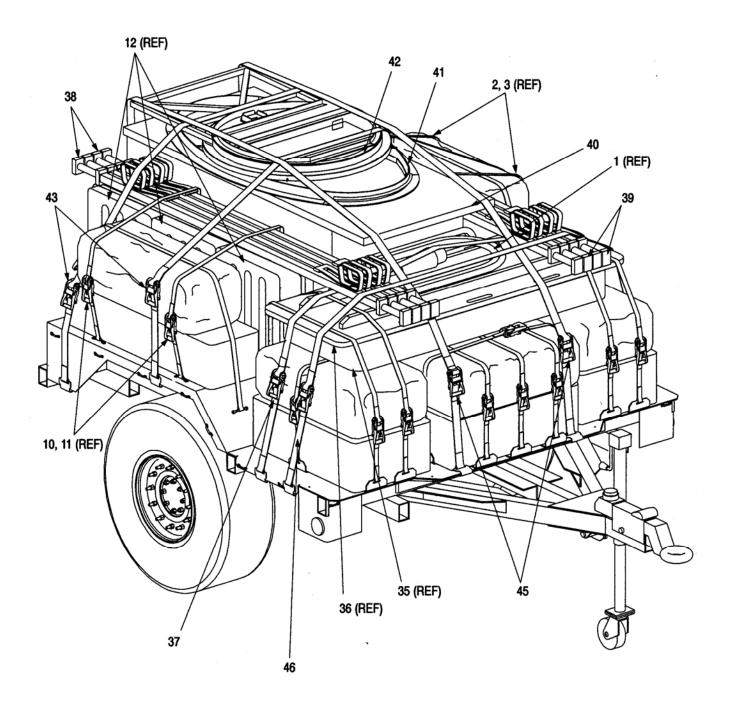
HMT Load Plan (Sheet 5 of 5)
